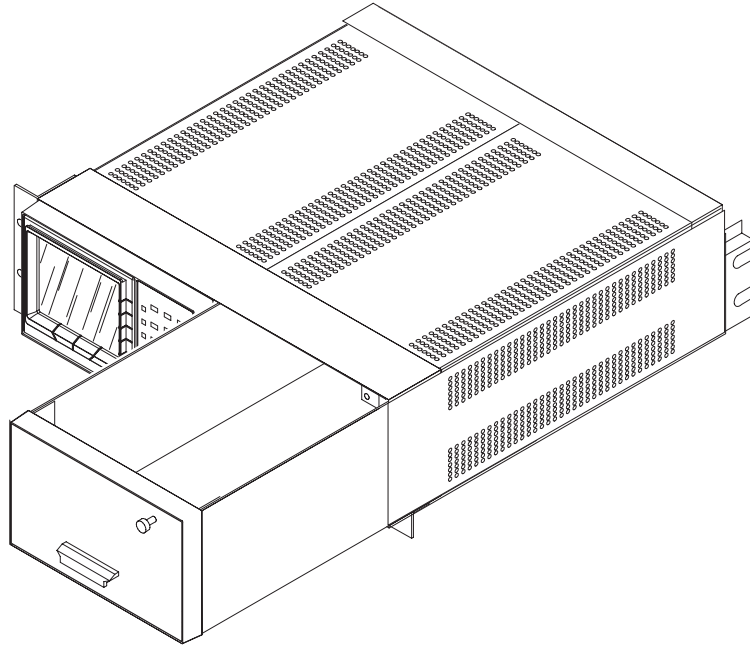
1700F05 Rack Mounting with a 1700F07 Utility Drawer
